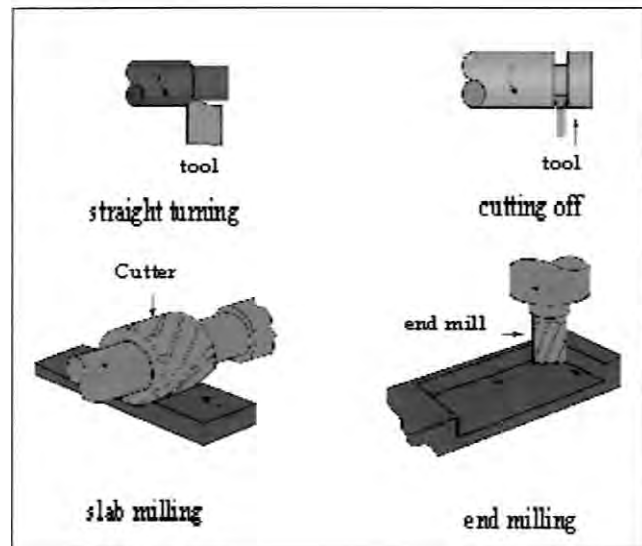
Some examples of common machining operations (Source: Kalpakjian, Schmid, 2006)
